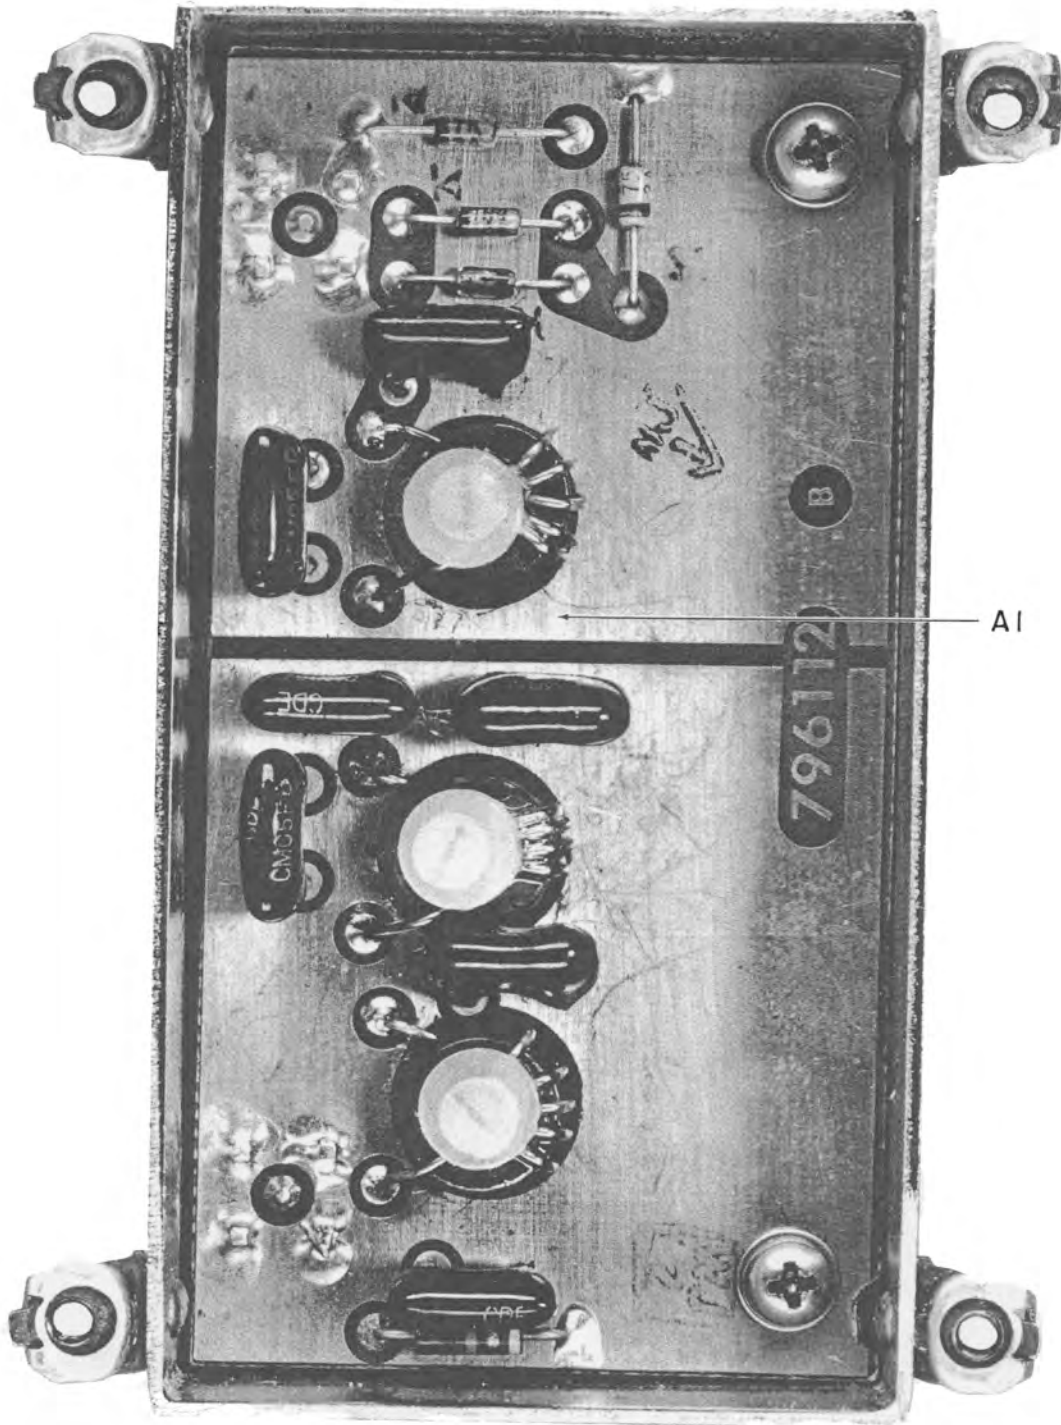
Type 796123 Input Filter Assembly (A1),
